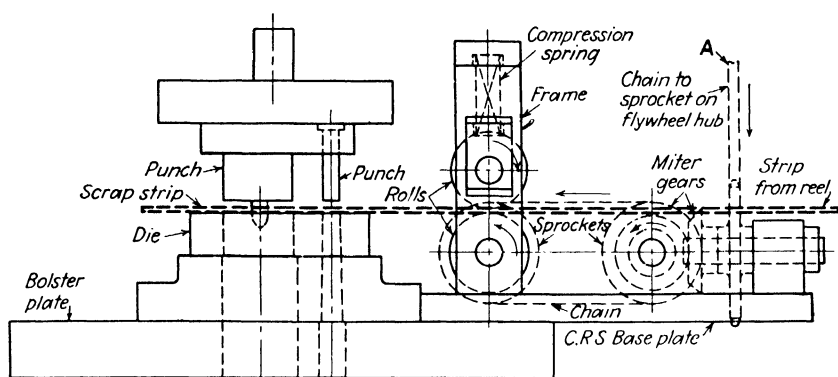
Pair of rolls for feeding strip over dies from right to left. This setup is for high-speed work. Rolls are driven by miter gears and sprocket chains located behind the strip. Driving chain *A* is driven from a sprocket wheel centered on the flywheel hub.
